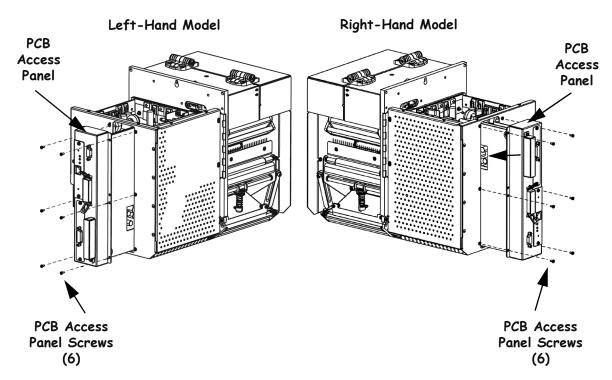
• Removal and Installation of PCB Access Panel from Print Engine
